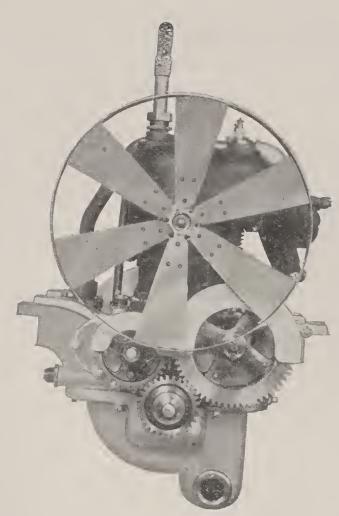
Front End of Motor, showing radiator fan and cam shaft gears.
